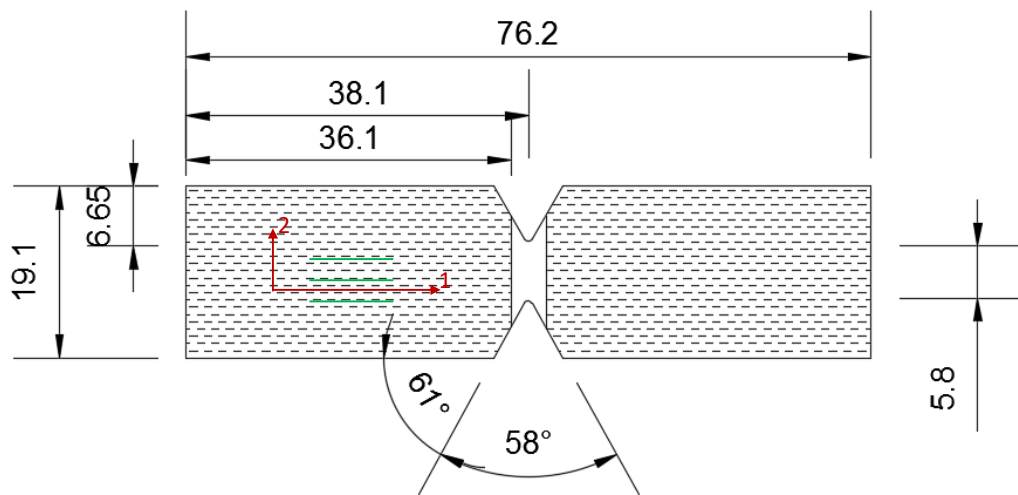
Modified Iosipescu Shear Specimen Nominal Dimensions and Layout (All Dimensions in mm)
